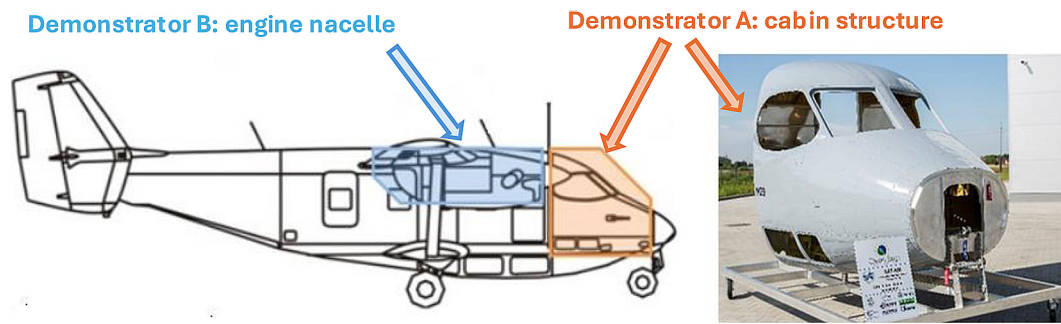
SAT-AM demonstrators: M28 aircraft side view (left), full scale Cabin Demonstrator (right)
